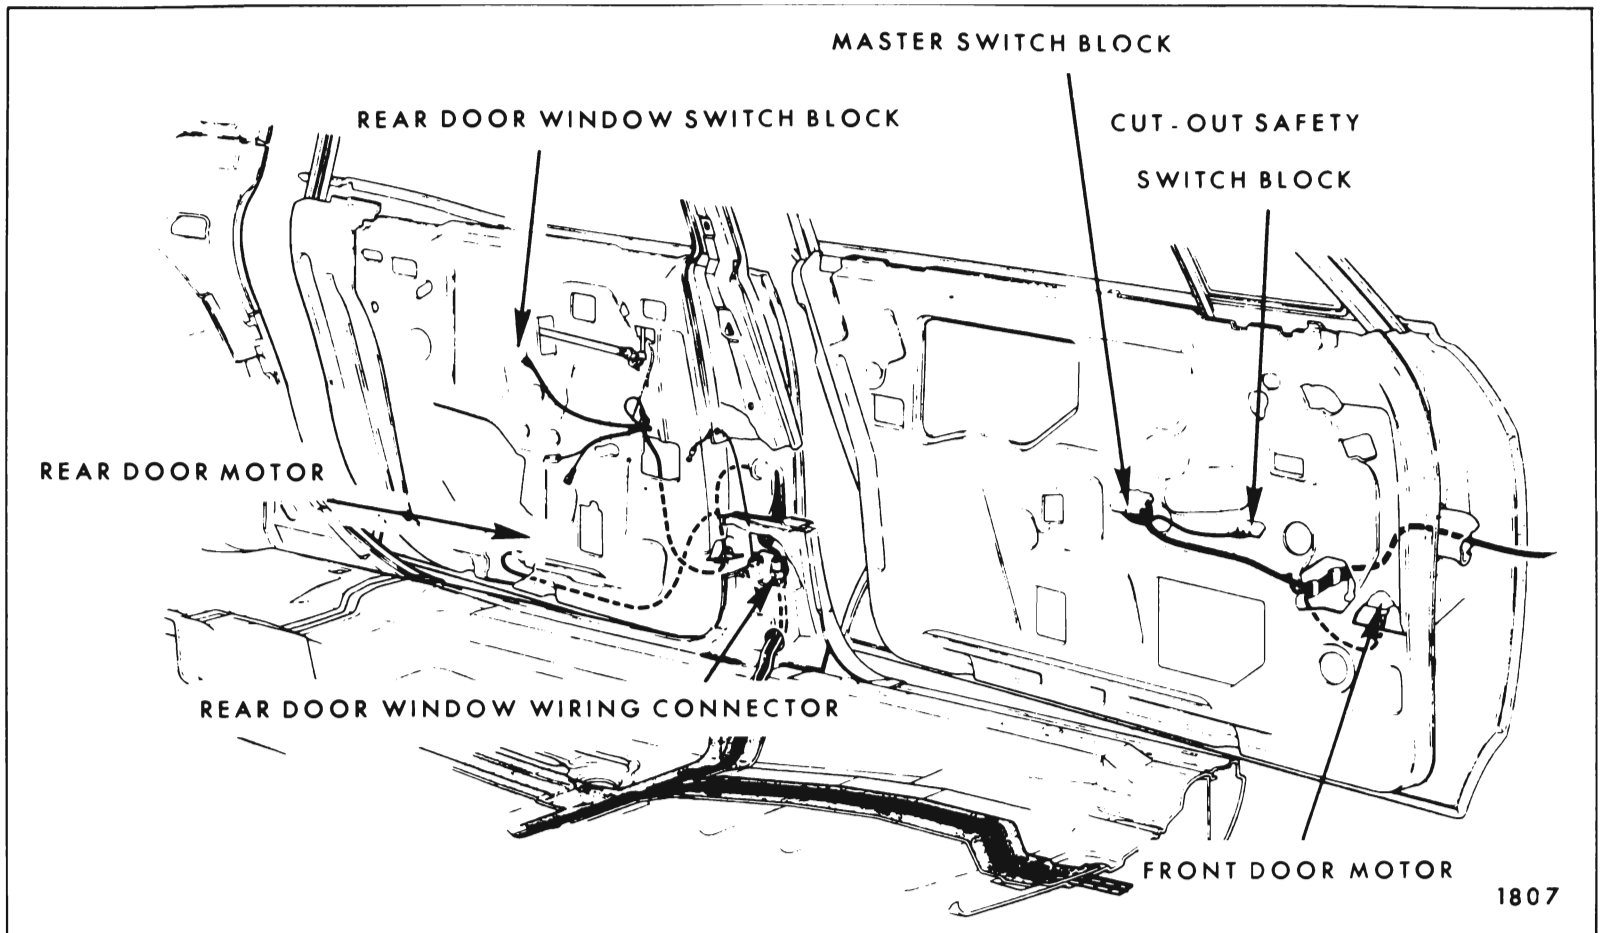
Left Side Power Window Wiring - Cadillac "39-69" Styles
